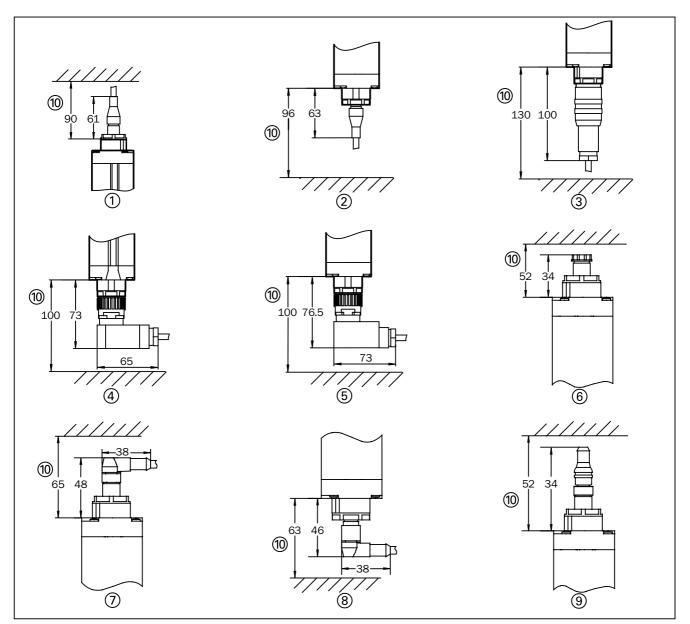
Dimensional drawings and mechanical detail of the connectors for the large housing
